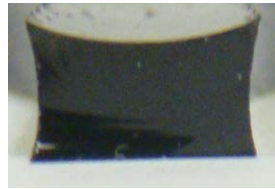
Cross-section of a tensile specimen from an open face mold.
